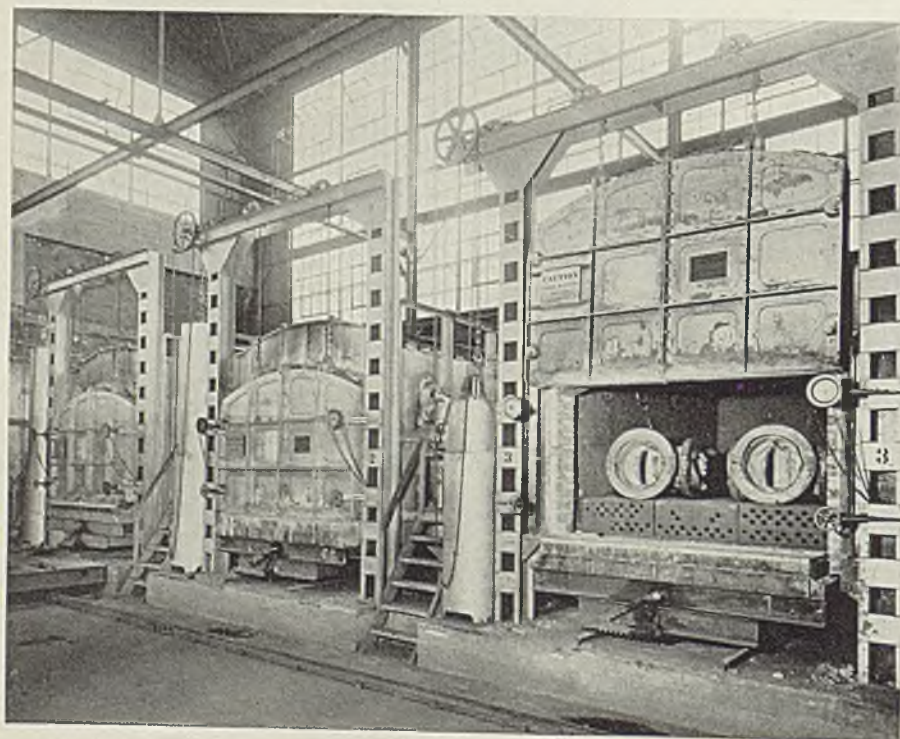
Car-bottom-type heat-treating furnaces are served by set of cross rails and transfer trucks which permit transferring castings as desired
